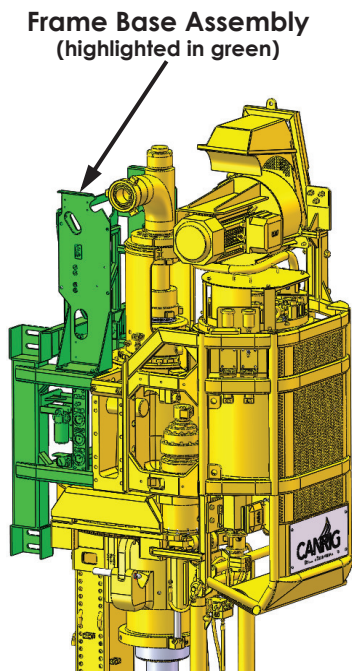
Frame Base Inspection Areas. Inspect both sides.
